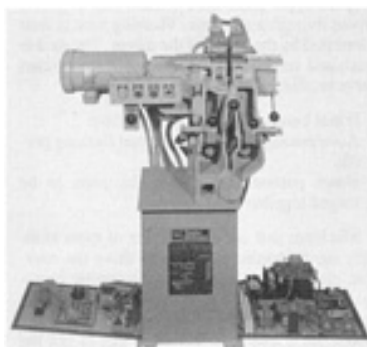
FLASH-WELDING MACHINE INSTALLATION EQUIPPED TO WELD BAND-SAW BLADES
